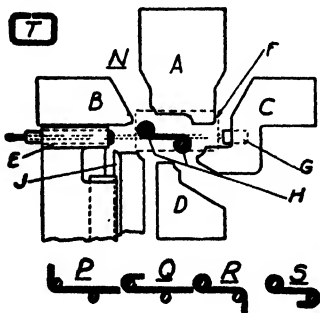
Forming a Link on a Multi-slide Machine.
